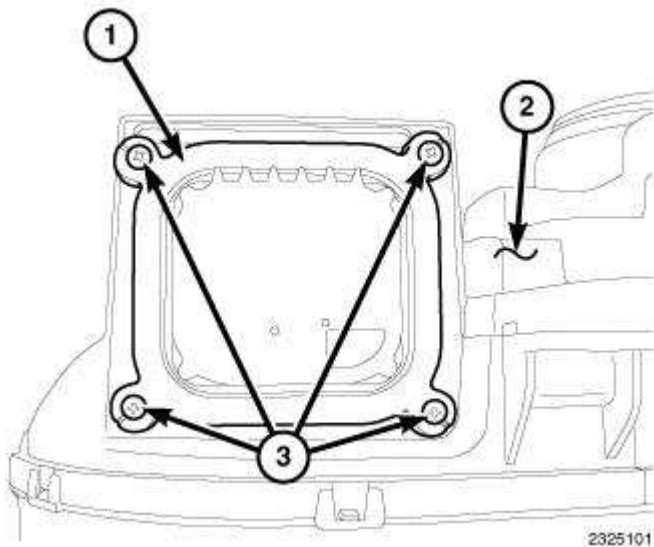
Identifying Ballast Module, Front Lamp Unit Housing & Screws
